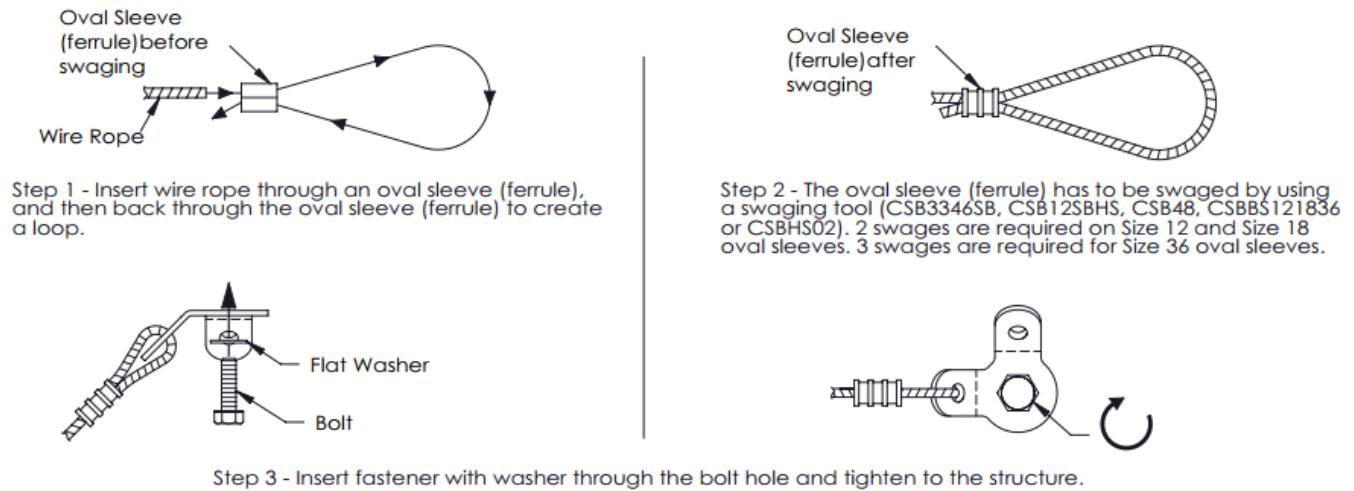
TYPICAL INSTALLATION INSTRUCTIONS
